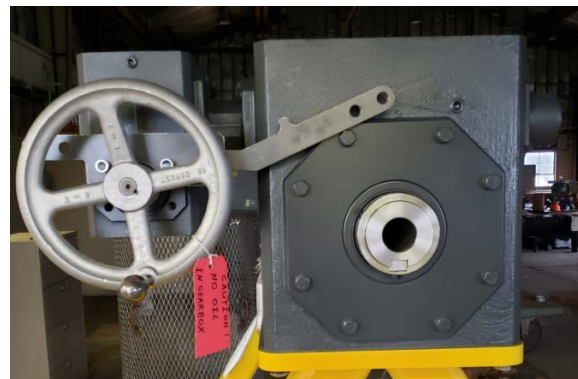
A-frame test article 'flipper', left. Bearing with gear box used to rotate flange 360 degrees.
